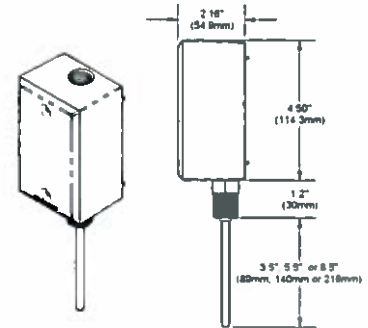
Double Threaded Immersion Sensor in a Weatherproof (WP) Enclosure
